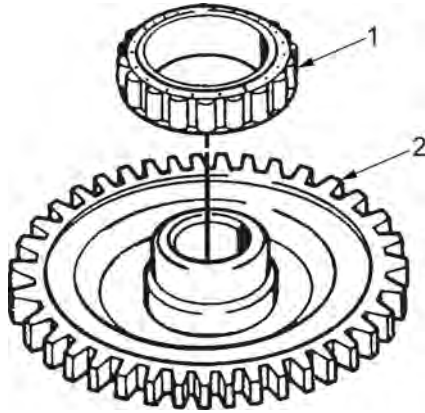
Left Steer and Output Sun Gear Bearing Installation.
